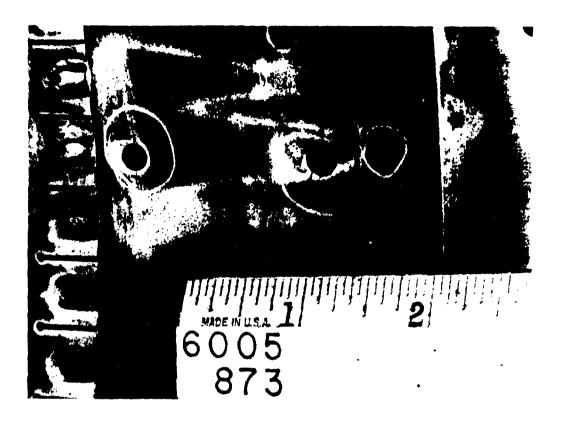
Cracks at the cooling holes on the inner walls of the combustor liner mounting system.
